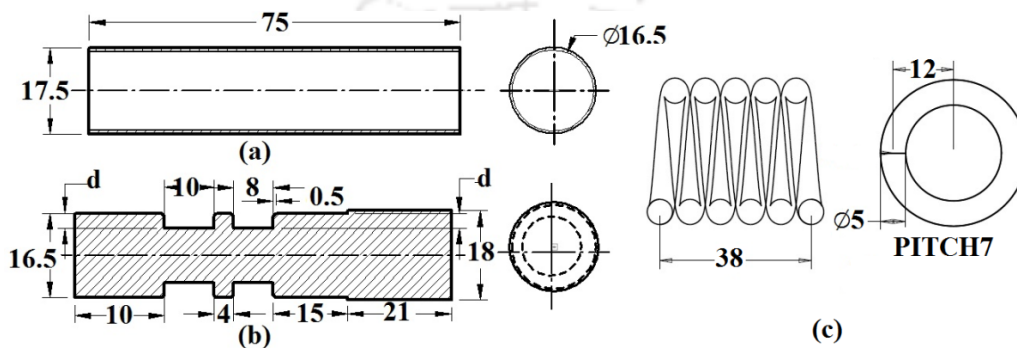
3 Detail dimension of (a) tube (b) rod and (c) coil (All dimensions are in mm)
